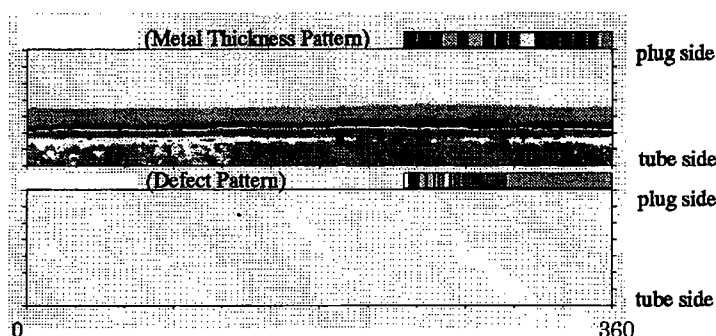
Two-dimensional Pattern of Weld UT microscope
